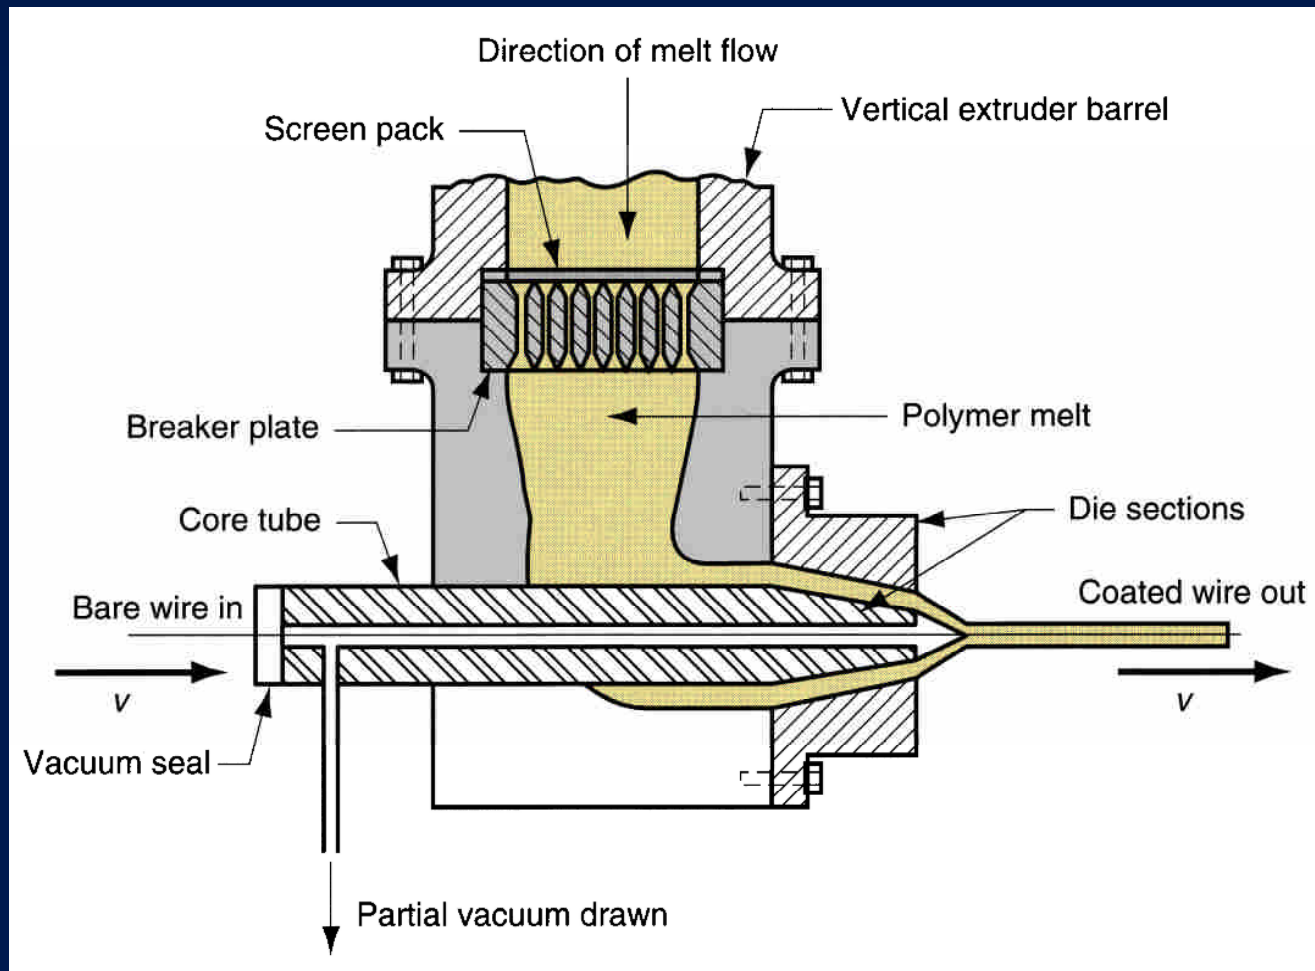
Side view cross-section of die for coating of electrical wire by extrusion
